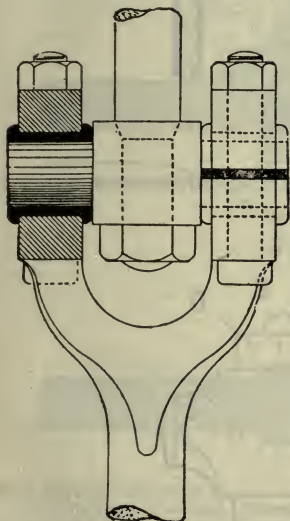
Marine connecting rod with forked wrist pin end, containing a double bearing for the wrist pin. The advantage of this form of rod is that the height of the cylinders may be less than with other types; it is difficult, however, to make uniform adjustment of the two bearings.
